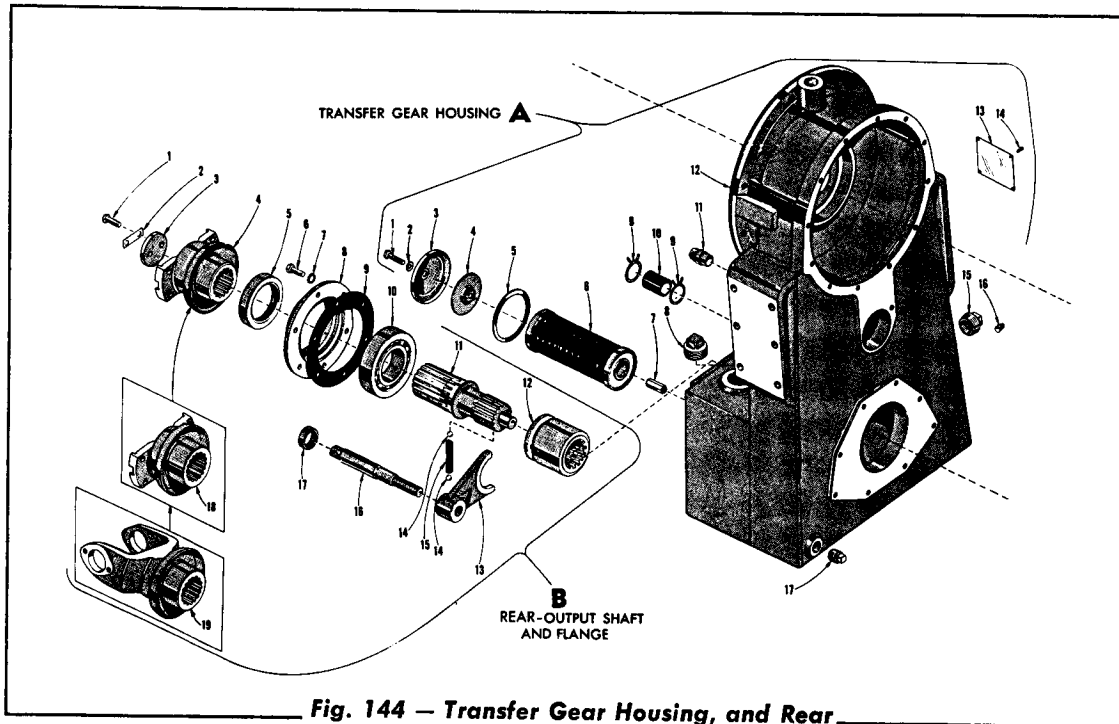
Transfer Gear Housing, and Rear Output Shaft and Flange
